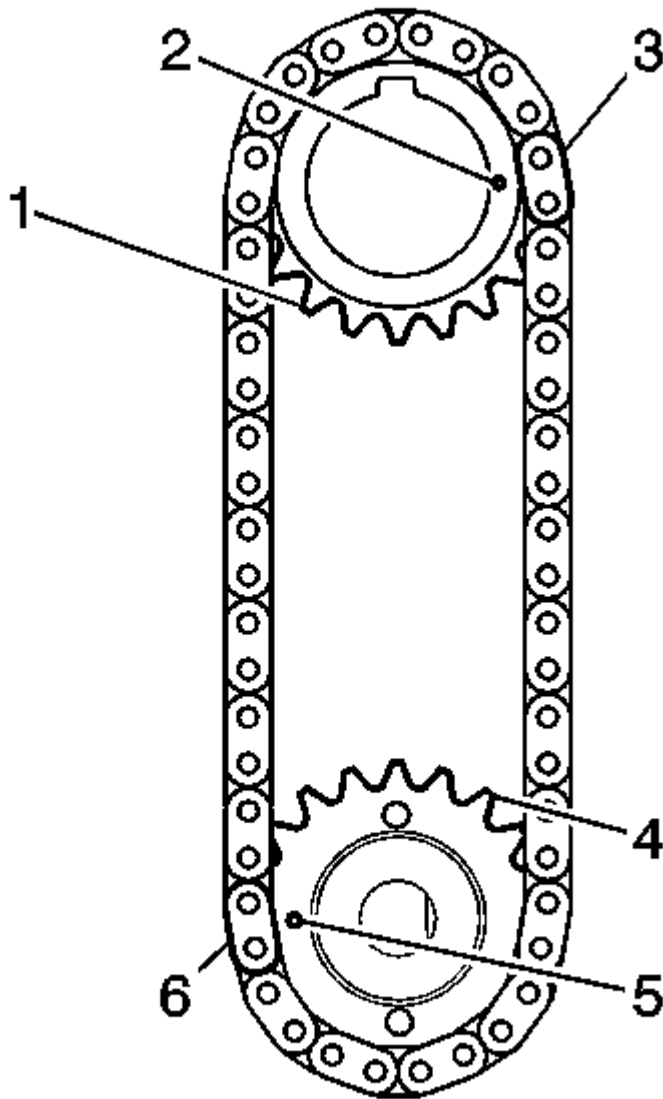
View Of Aligning Link Marks With Timing Marks Of Each Gear
